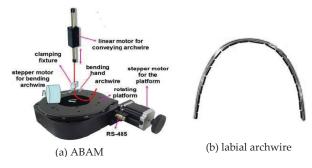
Automated Bending Archwire Machine (ABAM) and the output [1]
